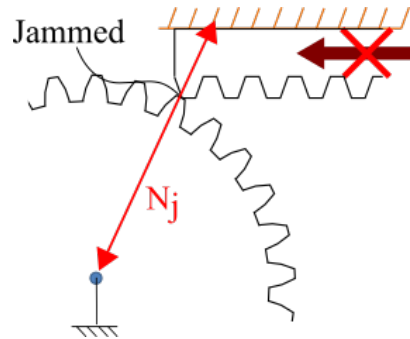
Gear teeth jamming problem of the rack-gear clutch
